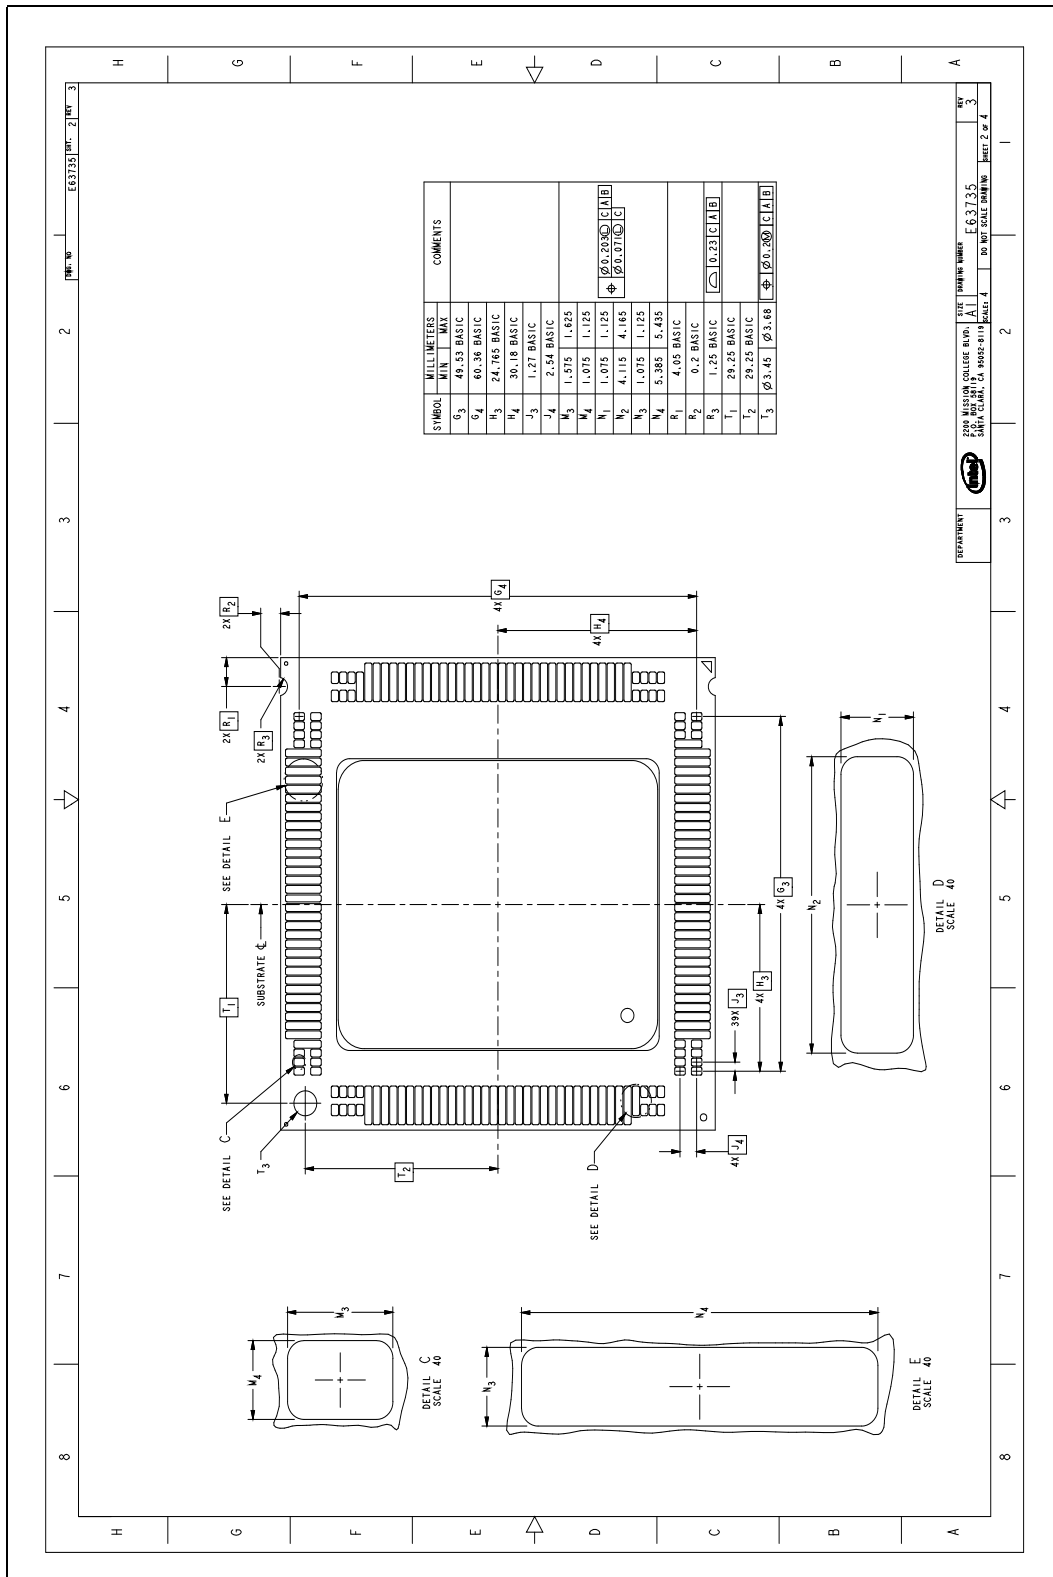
Intel® Itanium® Processor 9500 Series Package Drawing (Sheet 2 of 4)
